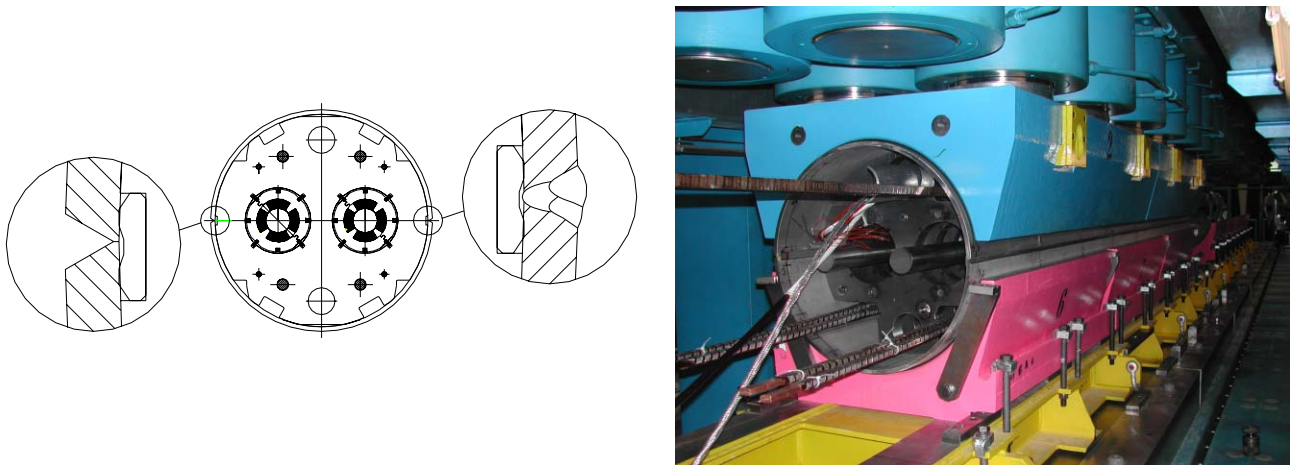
(Left) Geometry of the longitudinal weld: detail at left is before welding, detail at right shows the position of the three welding seams. (Right) Q9 quadrupole in place for longitudinal welding.
